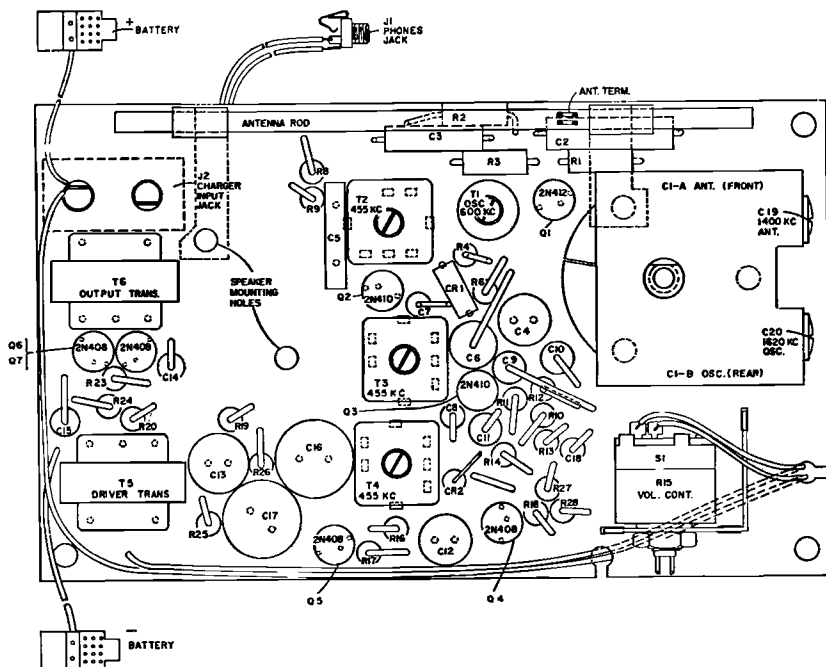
Chassis layout used in the 1-BT-3 receiver.
